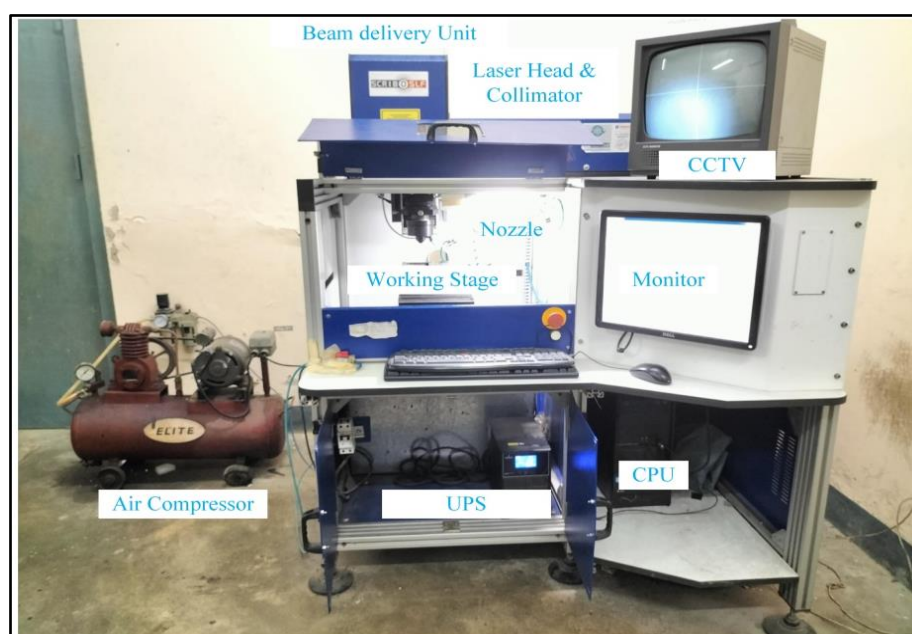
Photographic view of CNC pulsed fiber laser machining system
